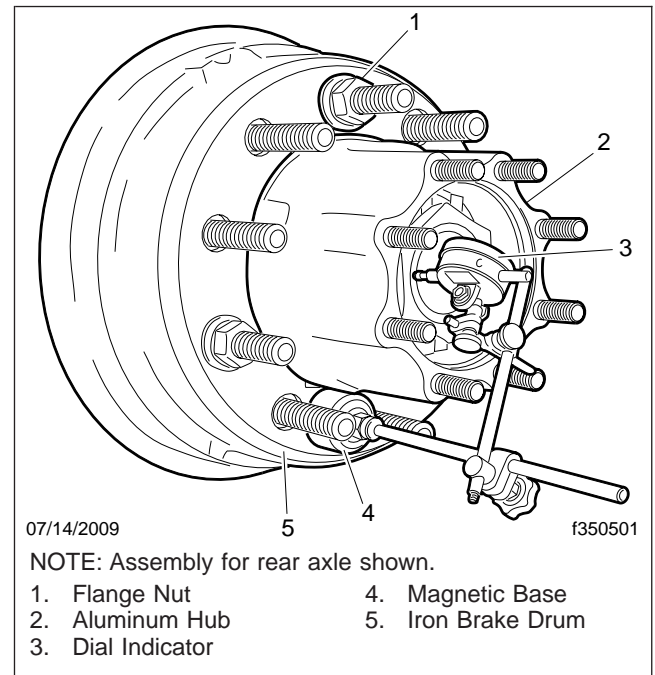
, Dial Indicator Setup, Aluminum Hub with Iron Brake Drum
